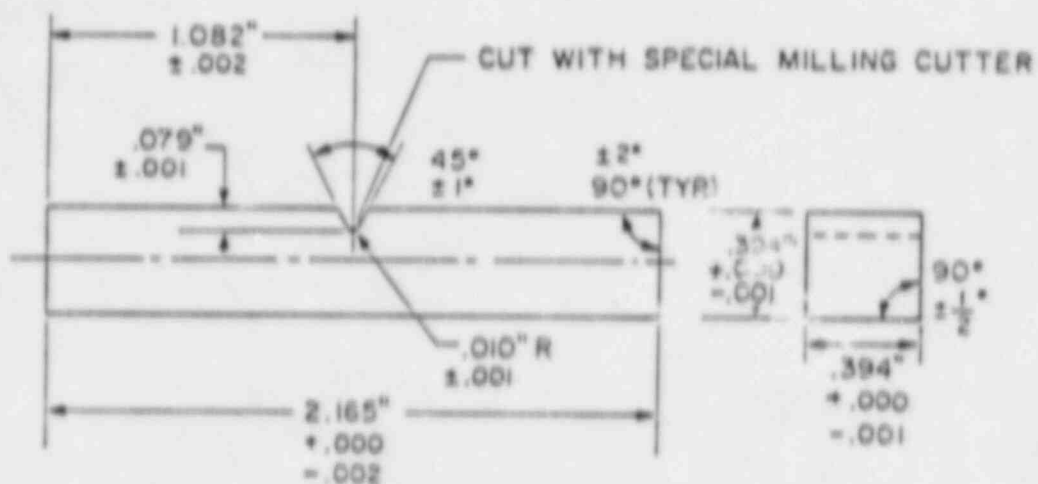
Charpy V-notch specimen design. (Dimensions in inches, 1" = 2.54 cm.)
